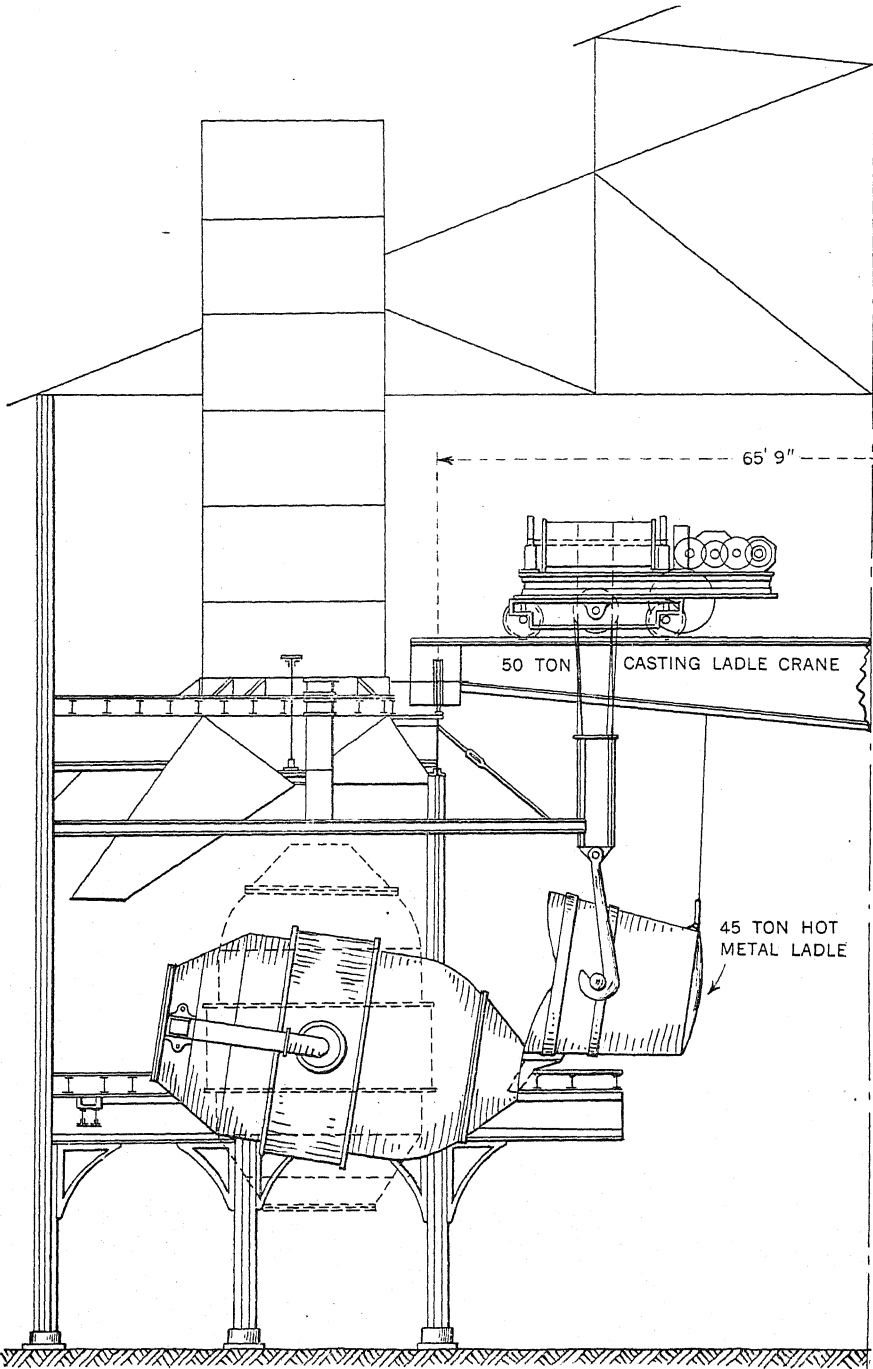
PART SECTION OF FIG. 1, SHOWING METHOD OF CHARGING THE CONVERTERS.
